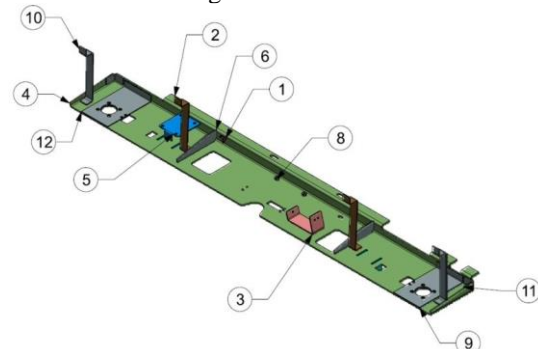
Improvements Of The Passenger Door Mounting Bracket
